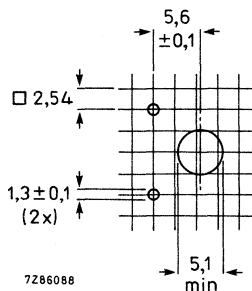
Hole pattern for mounting on a printed-wiring board.
